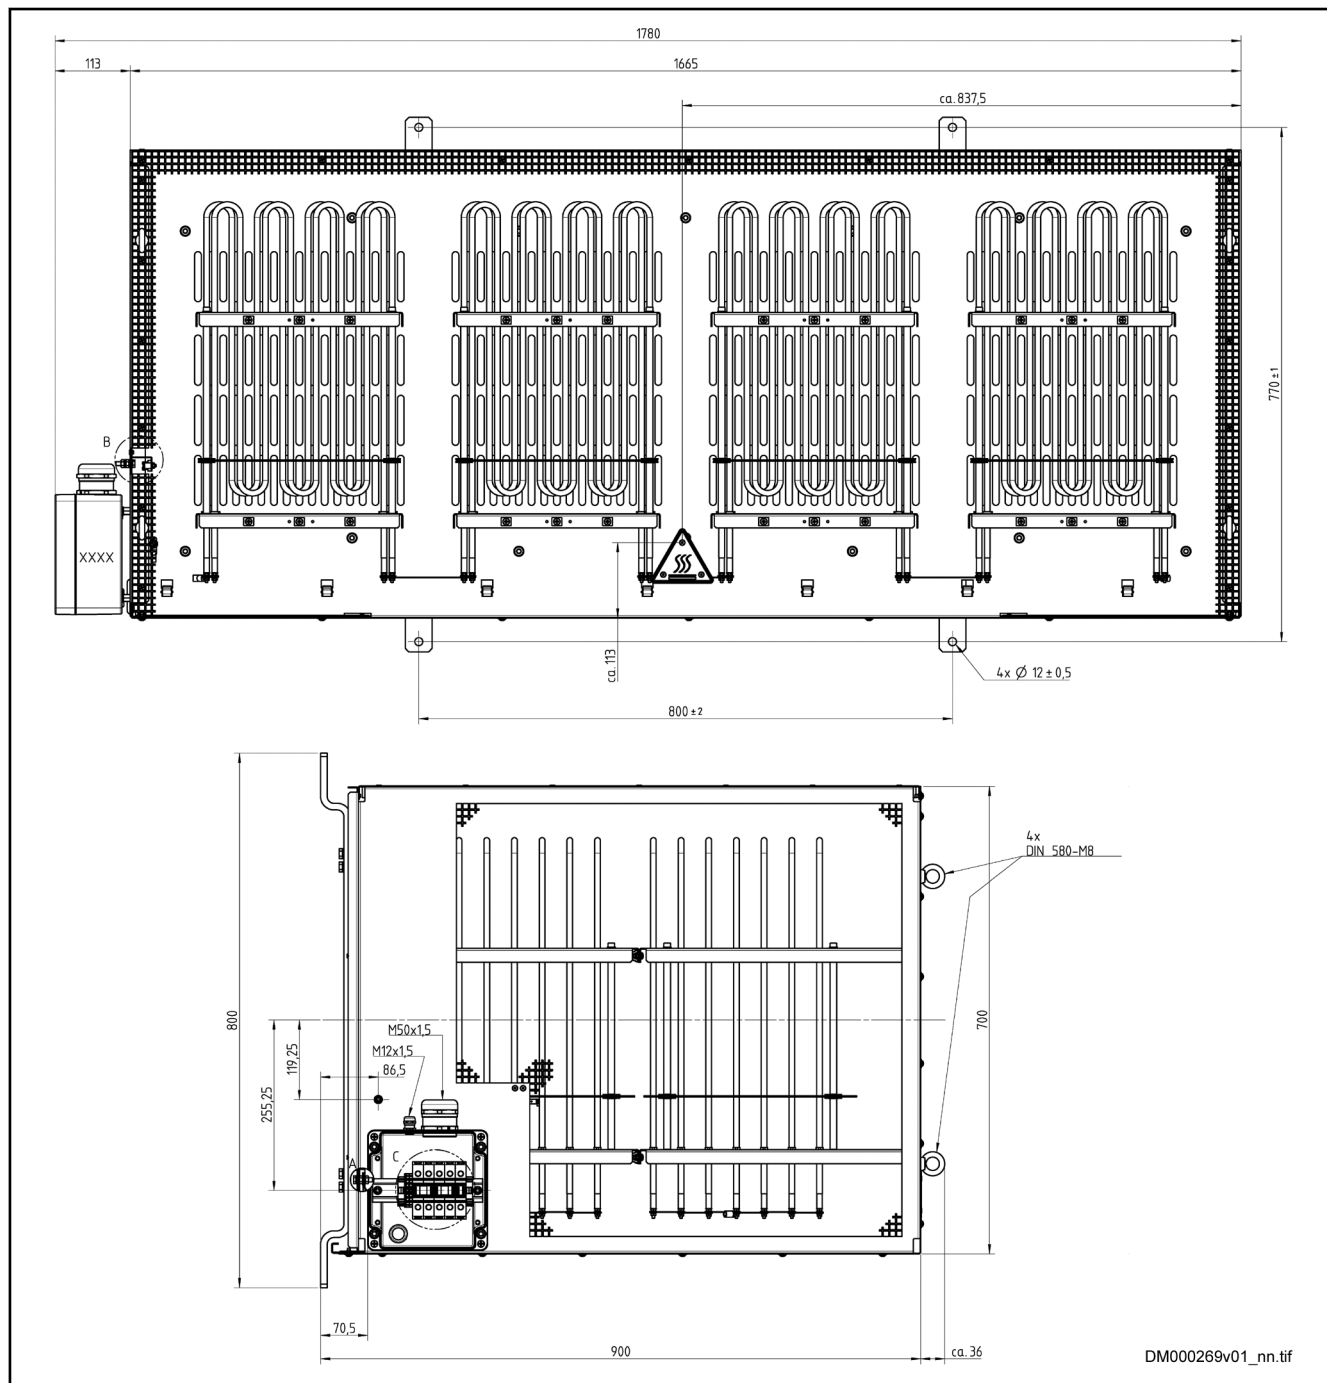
HLR05.1W-54K0-N05R4, ...-70K0-N04R0; dimensions in mm
